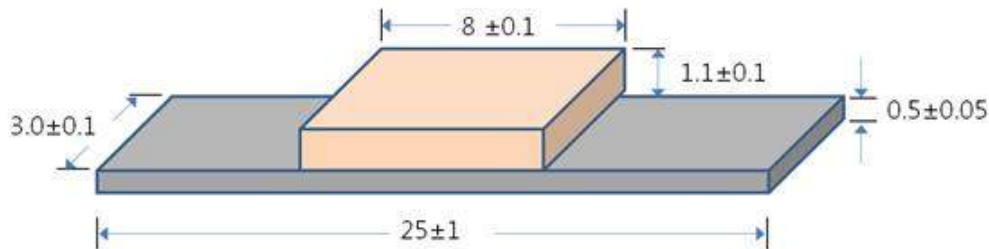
Test specimen configuration ISO 9693 (unit: mm).
